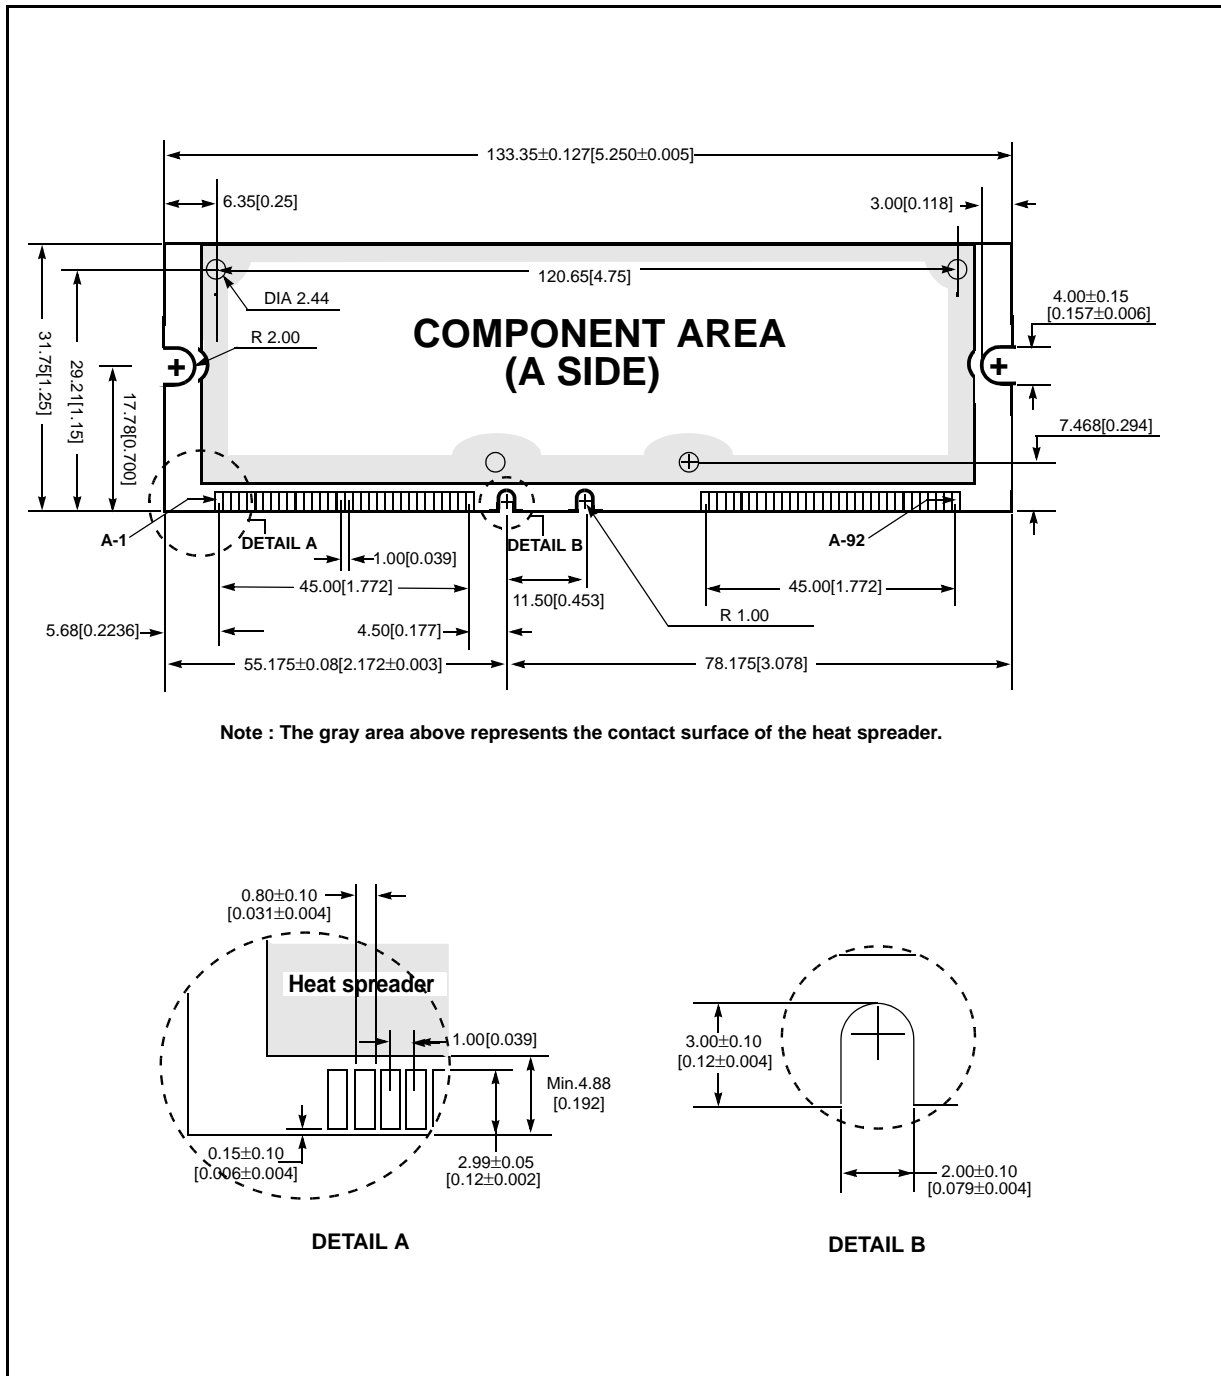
Consumer RIMM Module PCB Physical Dimensions
